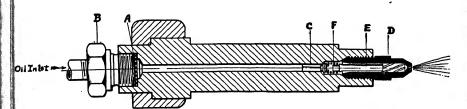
A. Copper gauze filter. B. Locknut on oil supply pipe. C. Check valve. D. Spray nozzle. E. Thread holding nozzle in spray valve body. F. Valve spring.
